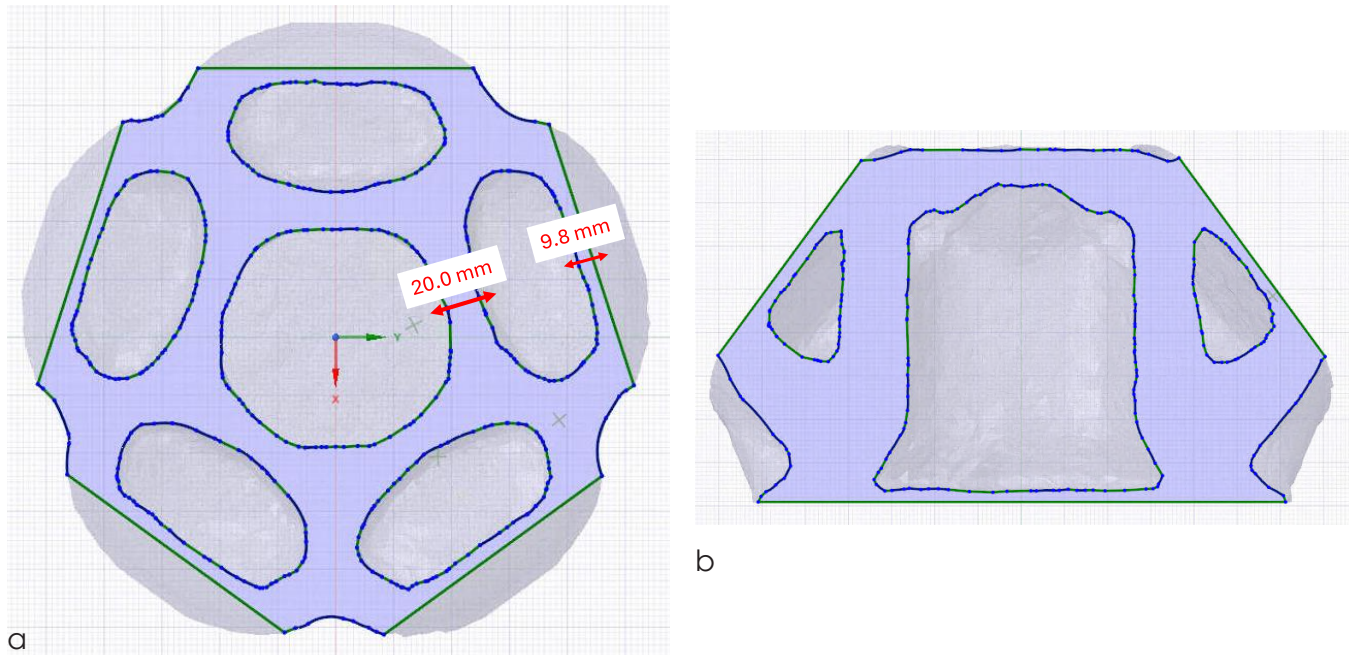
Cross section of the T0 geometry for the five branch connection
